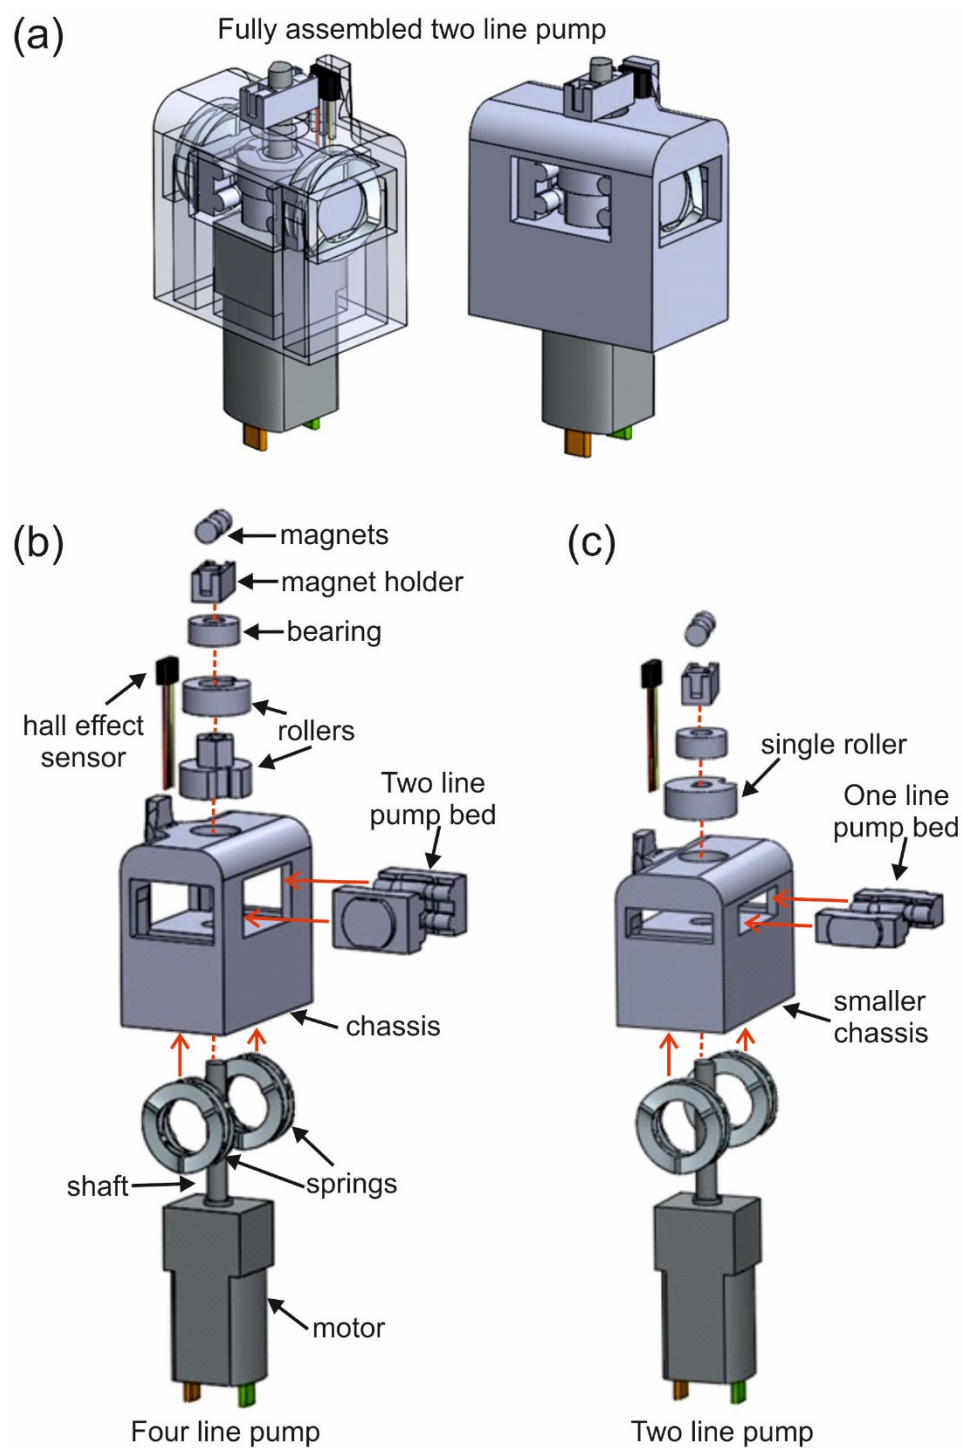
Solidworks CAD model of the fully assembled dual disc spring peristaltic pump. (a) Inside view and outside view. Exploded Solidworks model of (b) four line and (c) two-line, dual disc spring pumps.
